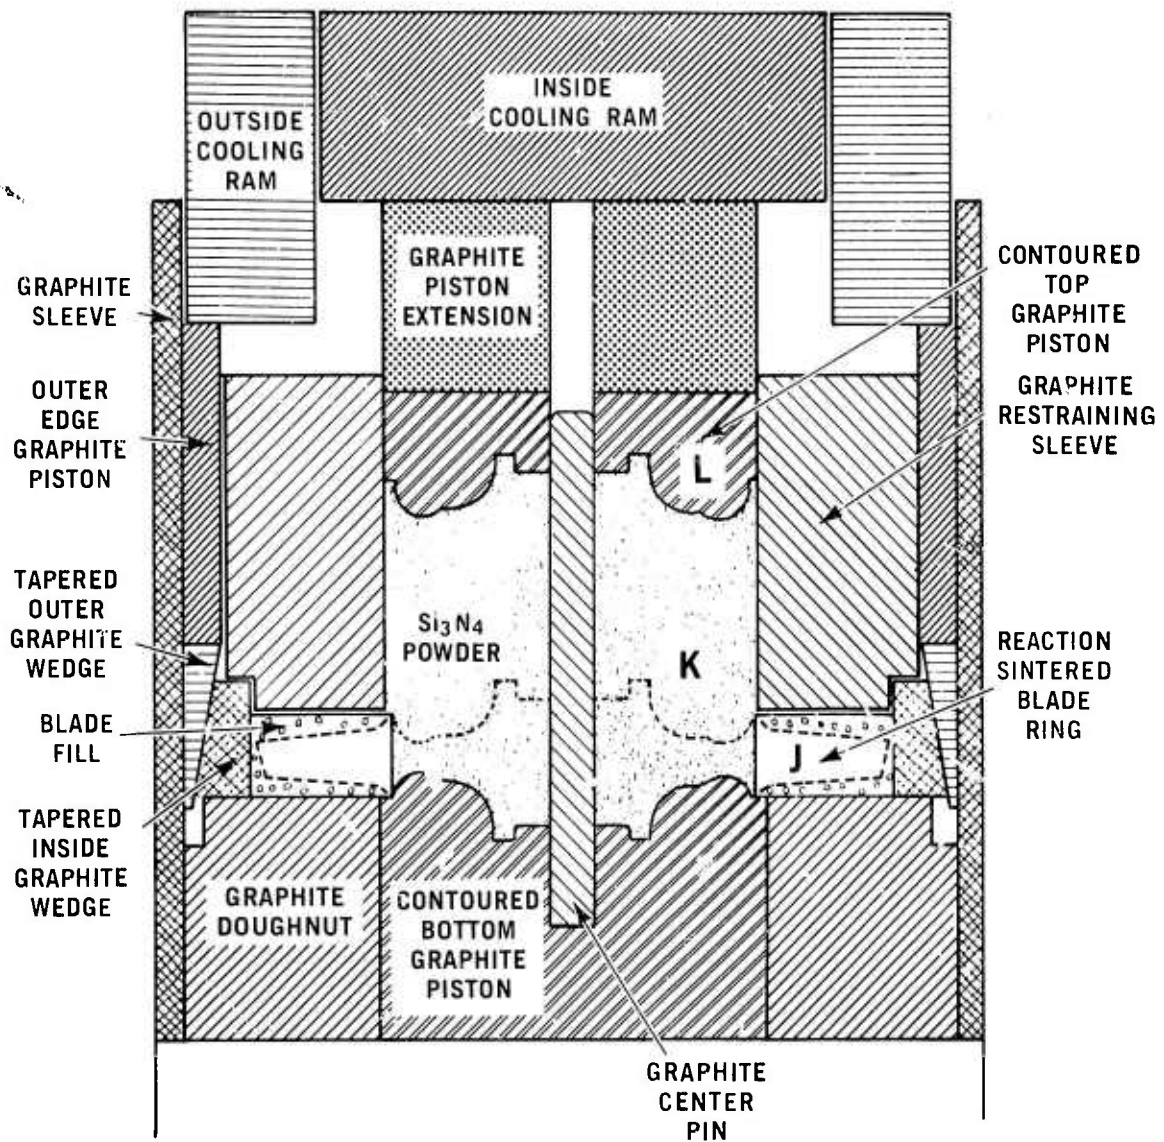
Modified Hot Press Bonding Assembly with No Inner Sleeve
